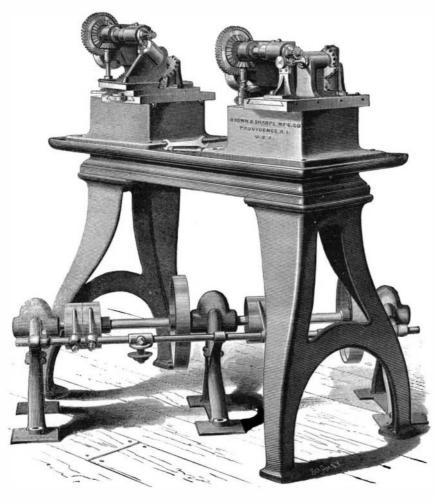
BEVEL AND SPUR GEAR CUTTING MACHINE.
